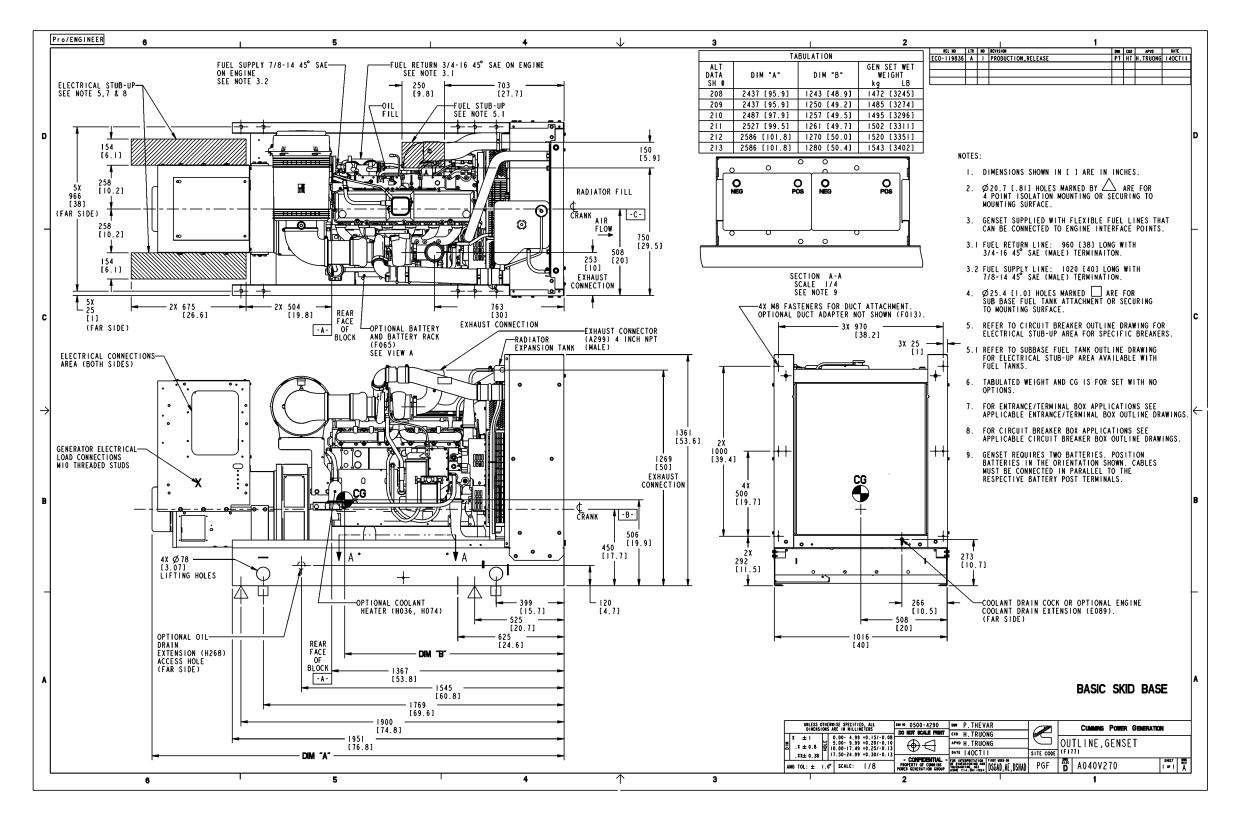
OUTLINE DRAWING - BASIC SKID BASE (SHEET 1)
